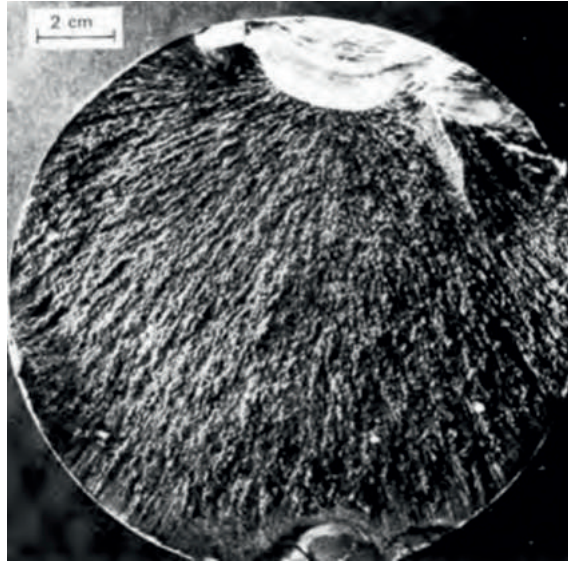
Photograph depicting a typical fracture face for fatigue failure [115].
